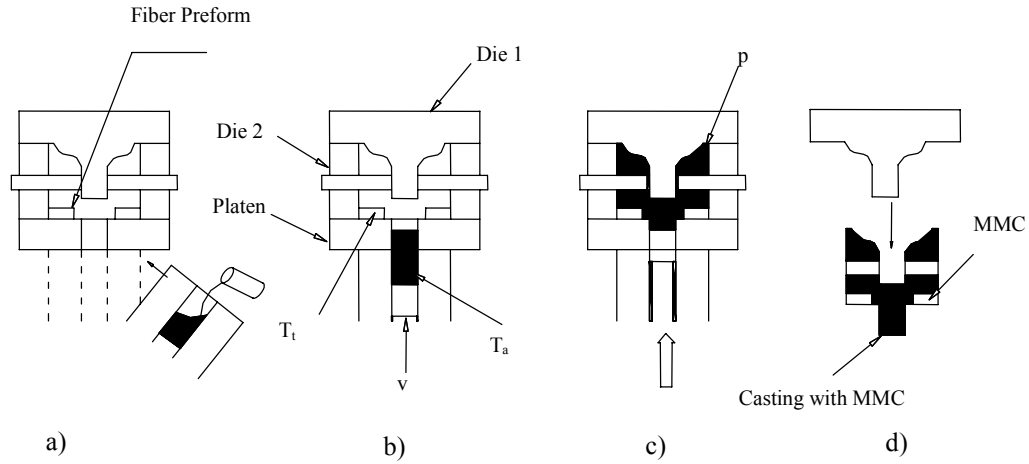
Sequences of the Squeeze casting process with a vertical machine (a) pouring (b) casting (c) squeezing and (d) ejecting
